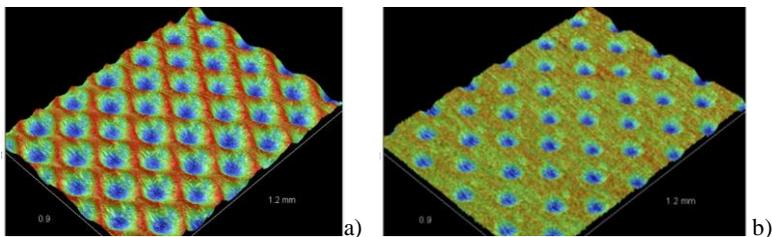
a) Surface shape after Hard Turning process, b) Surface shape after HaT and Honing process.
